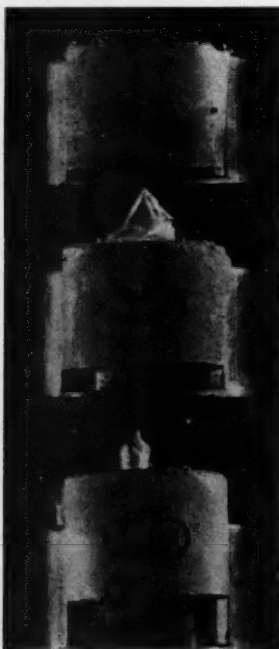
Experimental MOD castings made with Investo Superfine Investment moulds using the hygroscopic expansion technique. Water-investment ratios as shown. Mould temperature: 450°C.
